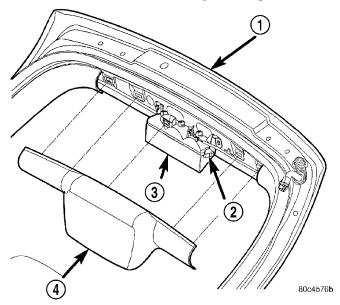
CENTER HIGH MOUNTED STOP LAMP AND COVER
